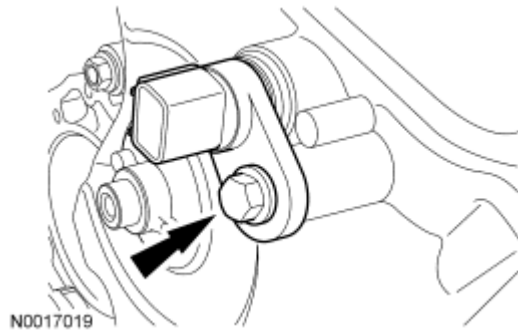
Locating Camshaft Position (CMP) Sensor And Bolt
